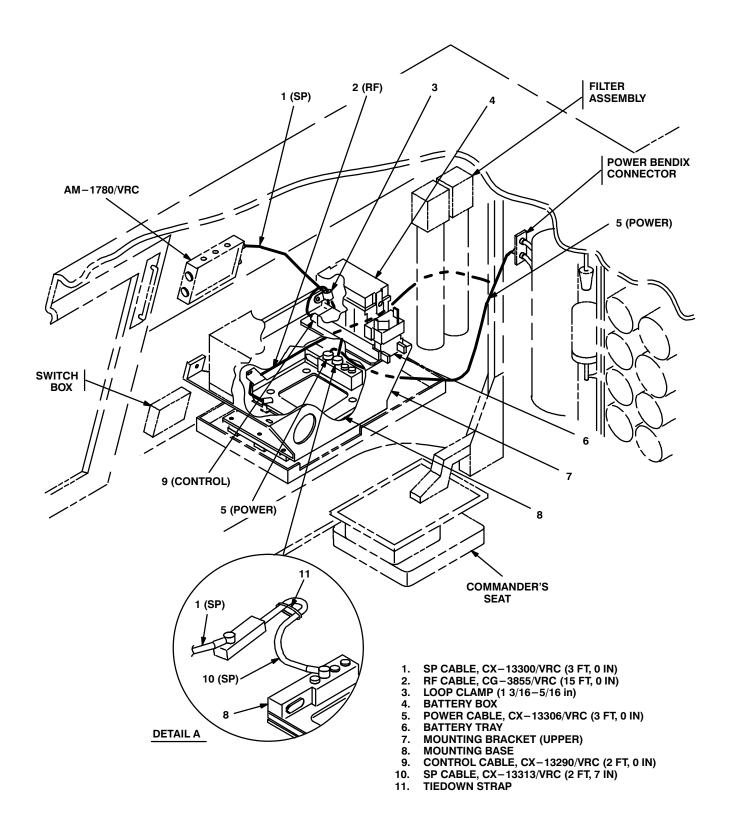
(2). Cable Installation: Power, SP and RF Cabling
